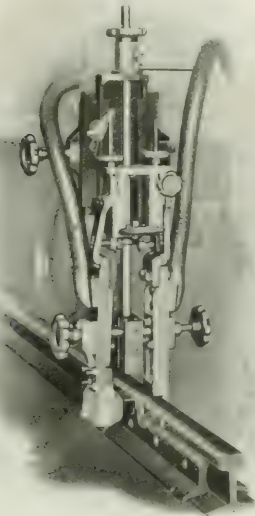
ELECTRODES IN POSITION FOR WELDING.
